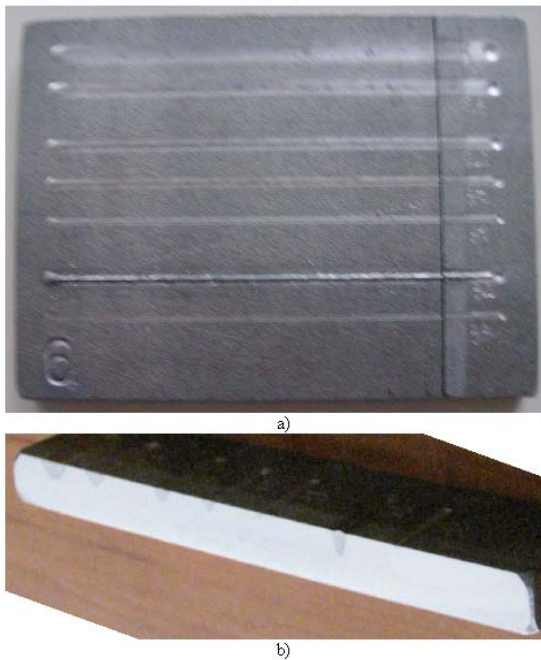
Photograph of the plate 6) Top view a) view section view, from left to right the welds: 27, 28, 29, 30, 31, 32, 33
